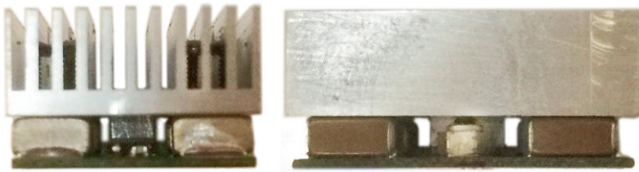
Front and side views of the new switching cell with modular heat sink mounted using the SMT nuts.
